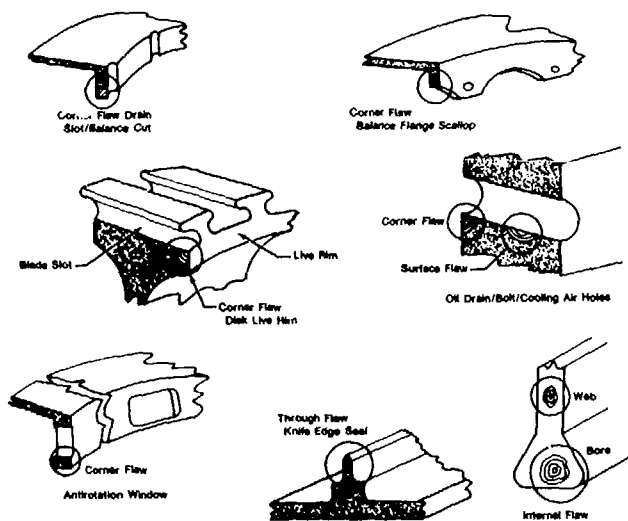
Sketch of typical gas turbine engine rotor component flaw types.
